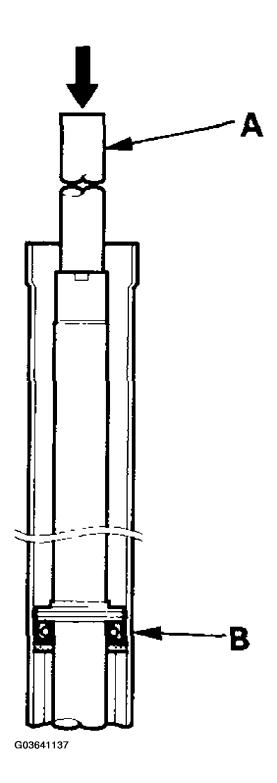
Inserting Deep Socket Wrench Onto Steering Rack Courtesy of AMERICAN HONDA MOTOR CO., INC.
